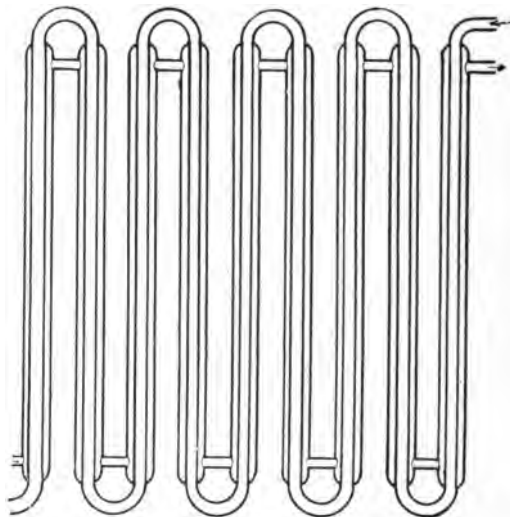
Counter-current cooling apparatus manufactured from sheet metal by autogenous welding.
